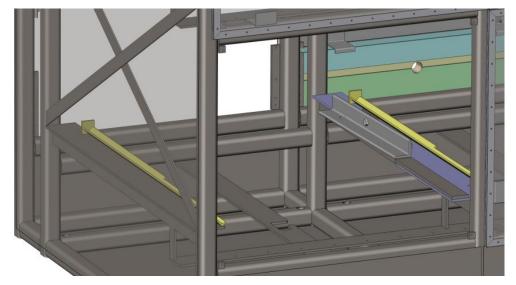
A model of the enclosure mounting rails that will hold the VIRUS units.
